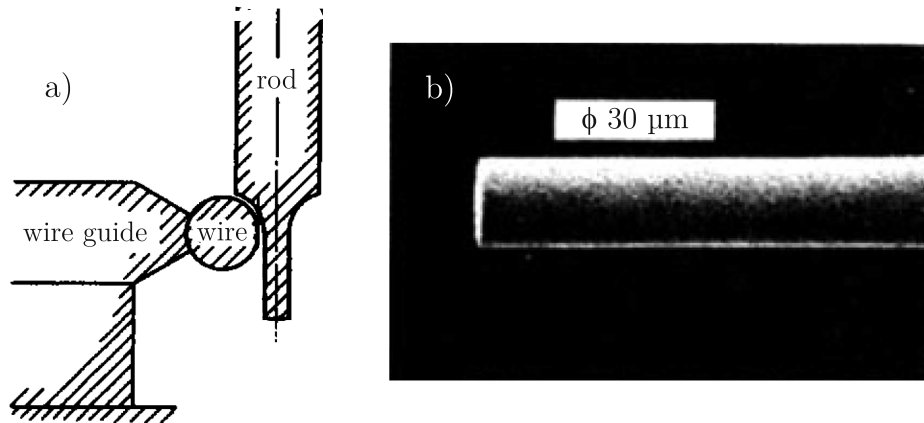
Wire electrical discharge grinding (WEDG): a) Schematic representation; b) Rod of diameter 30  $\mu\text{m}$  manufactured using WEDG [MASU85]
